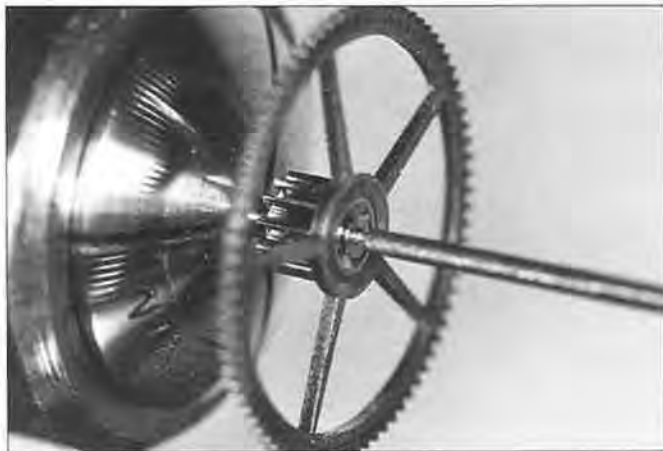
The hole was drilled about  $\frac{3}{4}$  of the pivot length.
